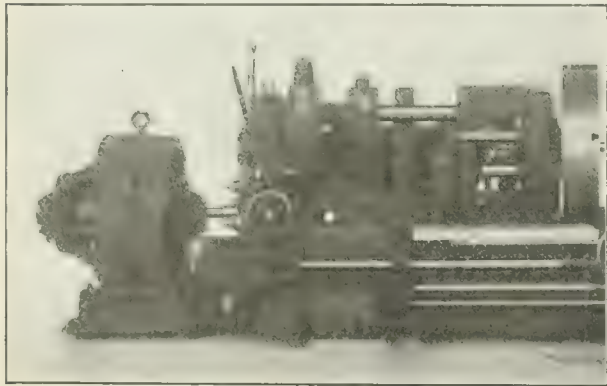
Partial Gear Guards for 36-in. Headstock.
